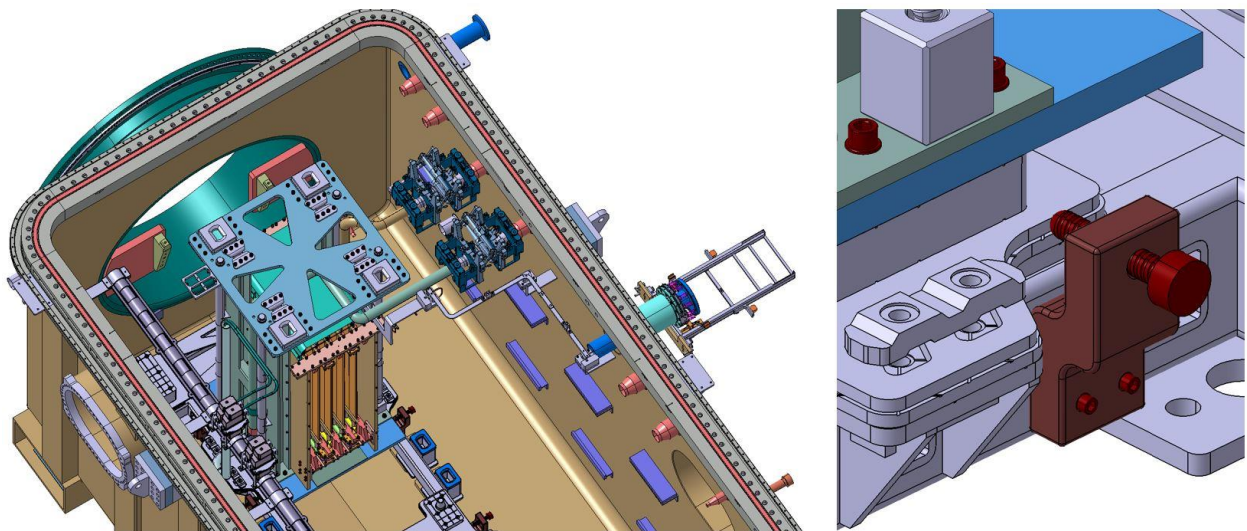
Assembly of RID inside DNB Vessel and connection with alignment mechanism
